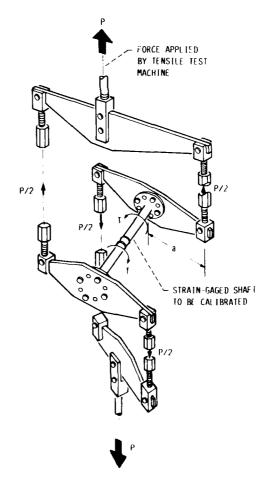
Fixture used for shaft strain gage torque bridge calibration. Applied torque, T = Pa.
